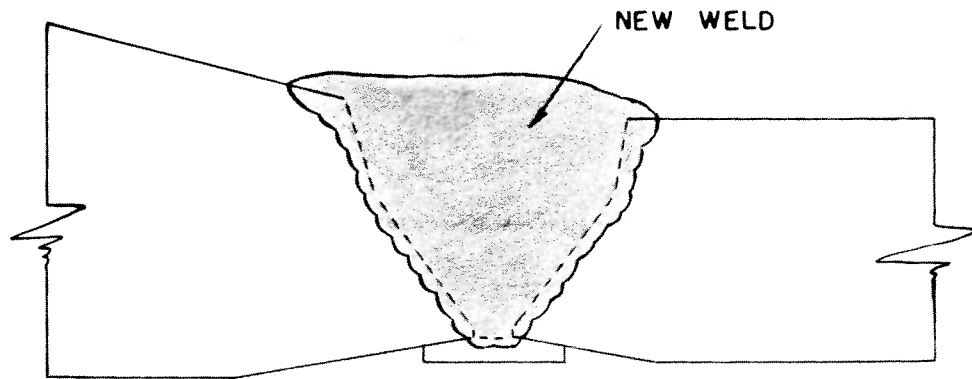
Sketch illustrating procedure for partial grooving out and rewelding of joint with graphitization on both sides of the weld.
